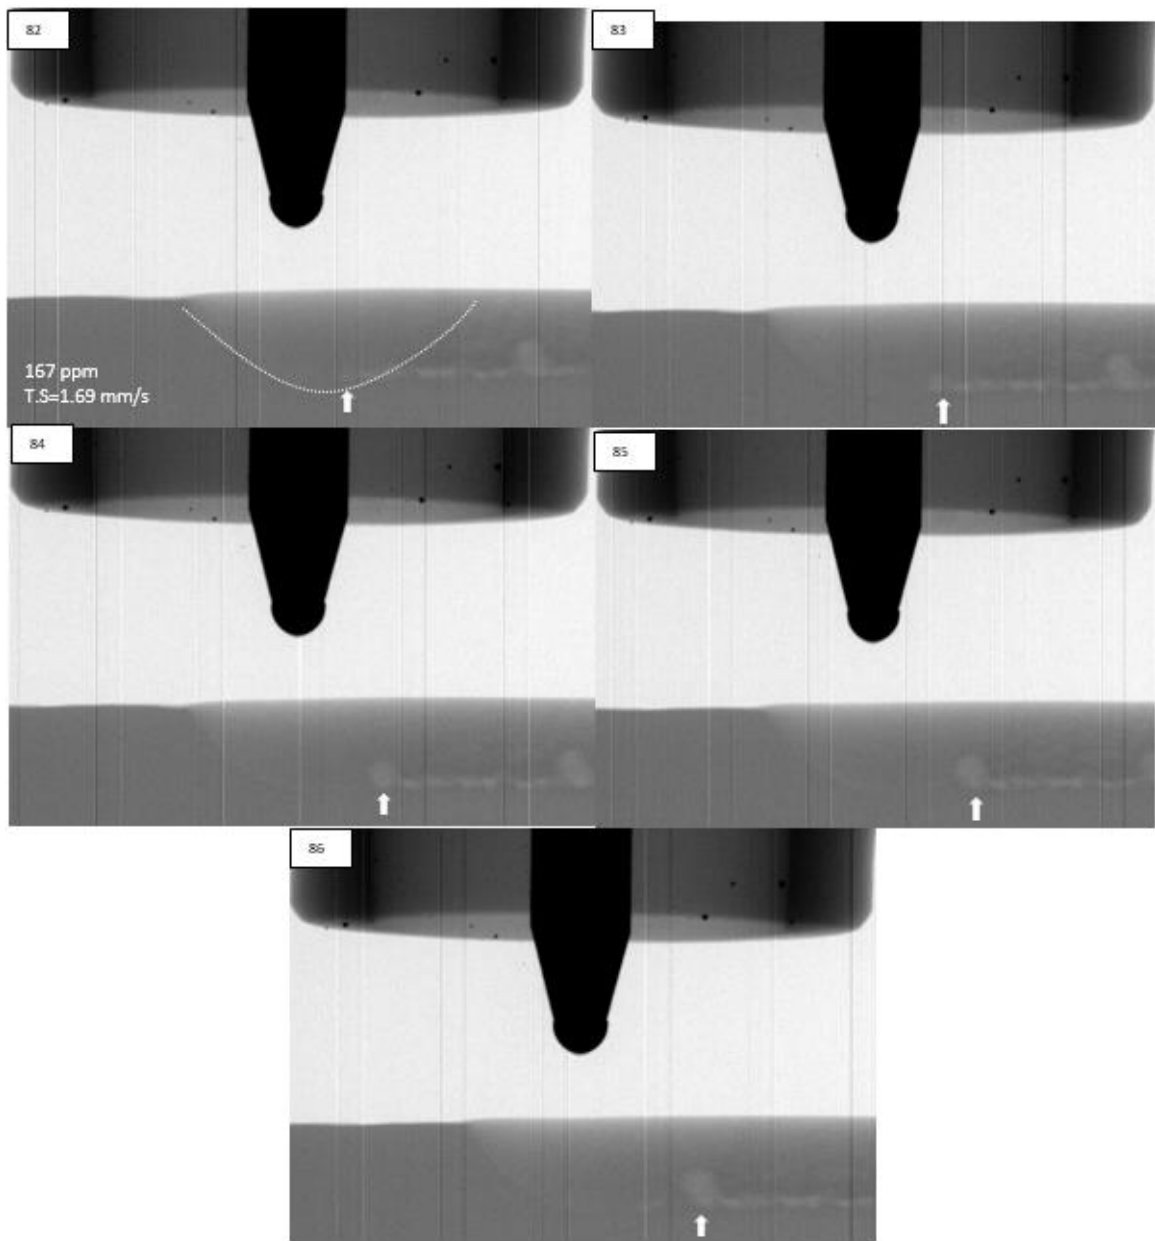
Alloy 1100 welded using 167 ppm of shielding gas hydrogen at 1.69 mm/s.
